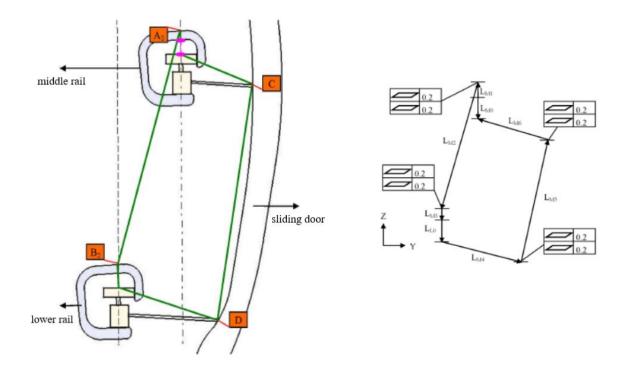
Fitting state(left) and dimensional chain with GD&T(right) in Z axis (middle
